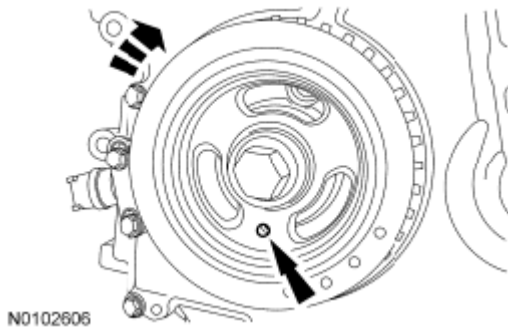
Turning Crankshaft Clockwise To Position No. 1 Piston At Top Dead Center
